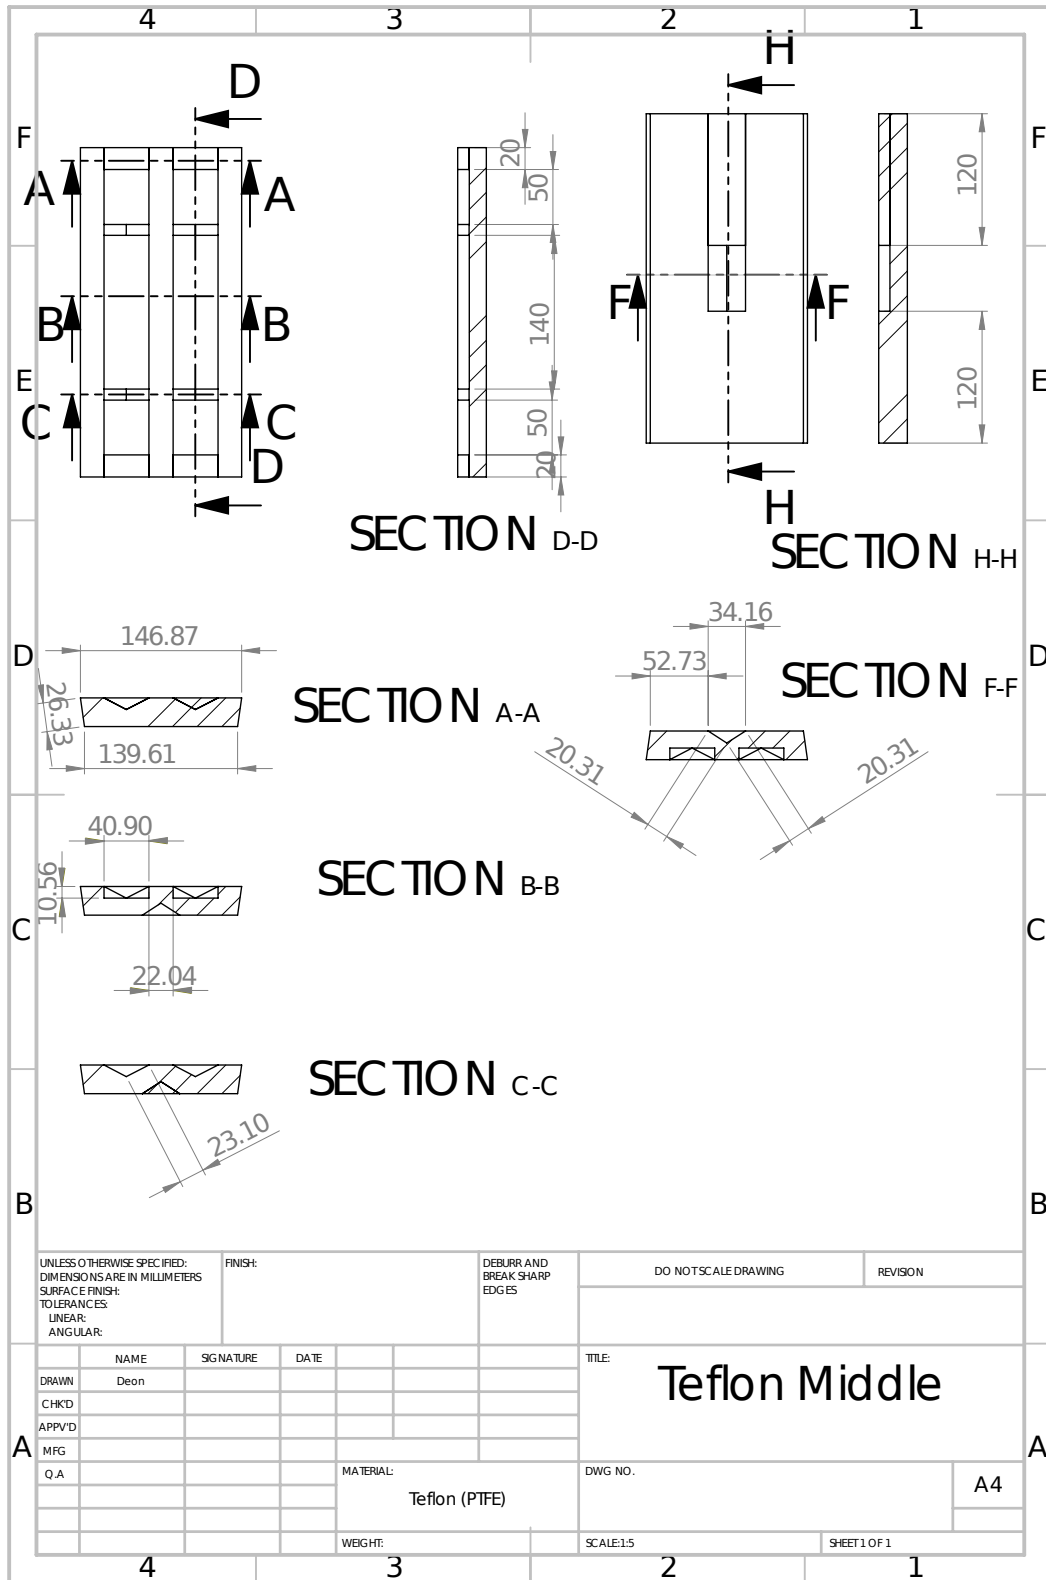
Drawing of PTFE upper mount for cavities in vacuum chamber
